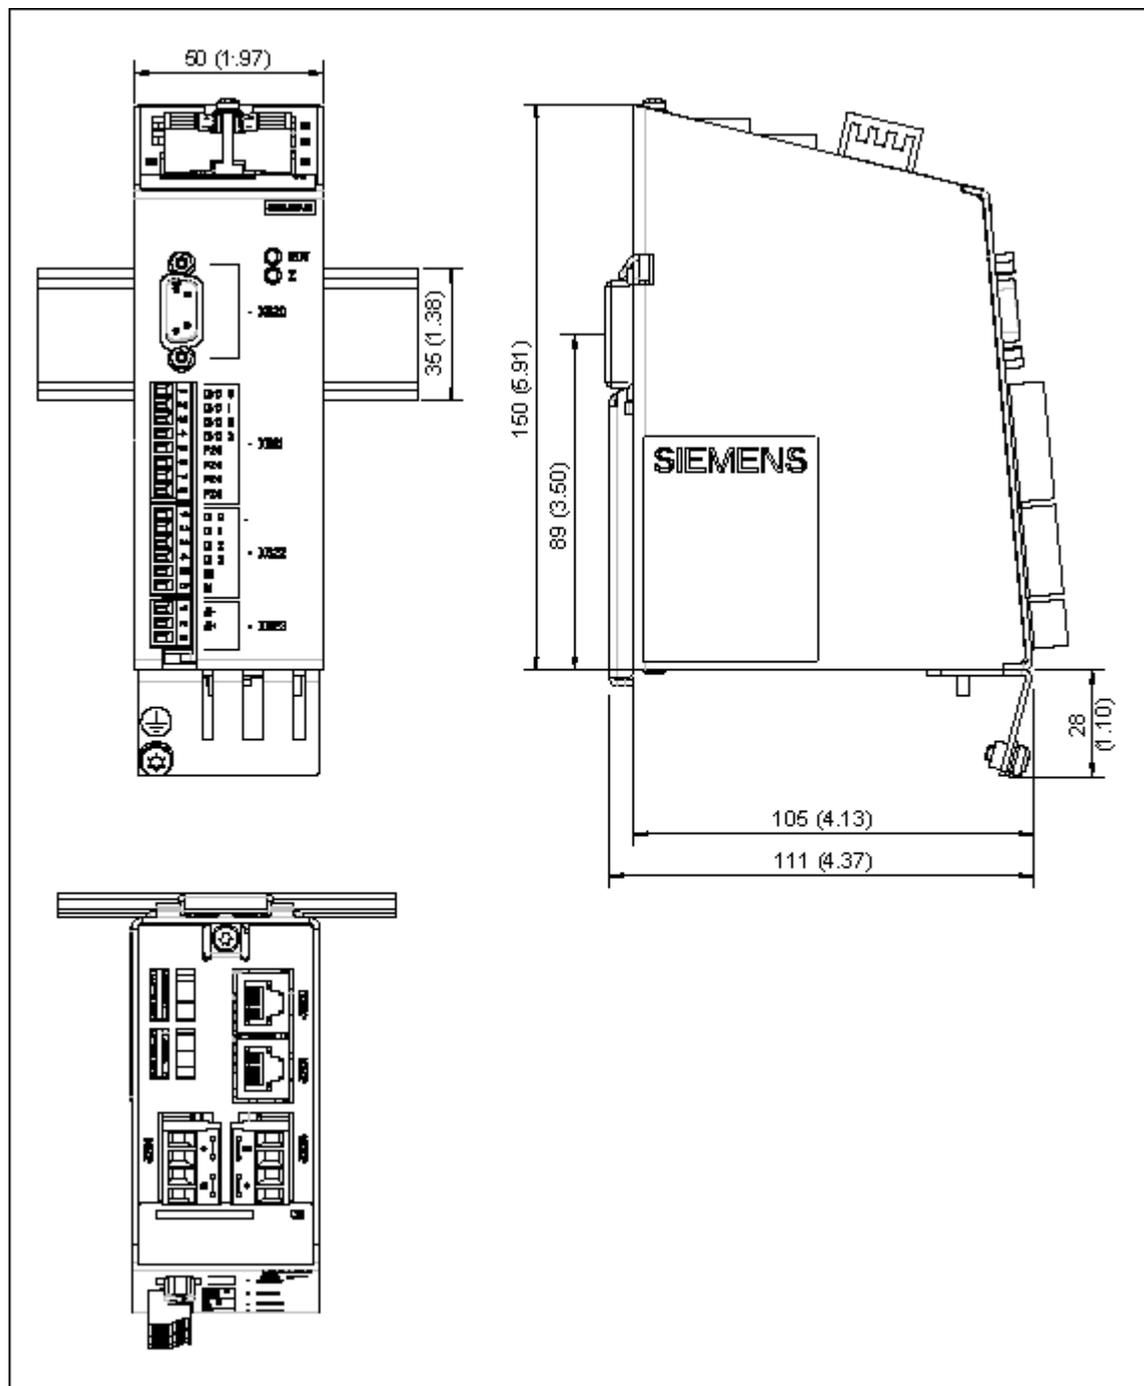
Dimension drawing TM41, Order number 6SL3055-0AA00-3PA1
